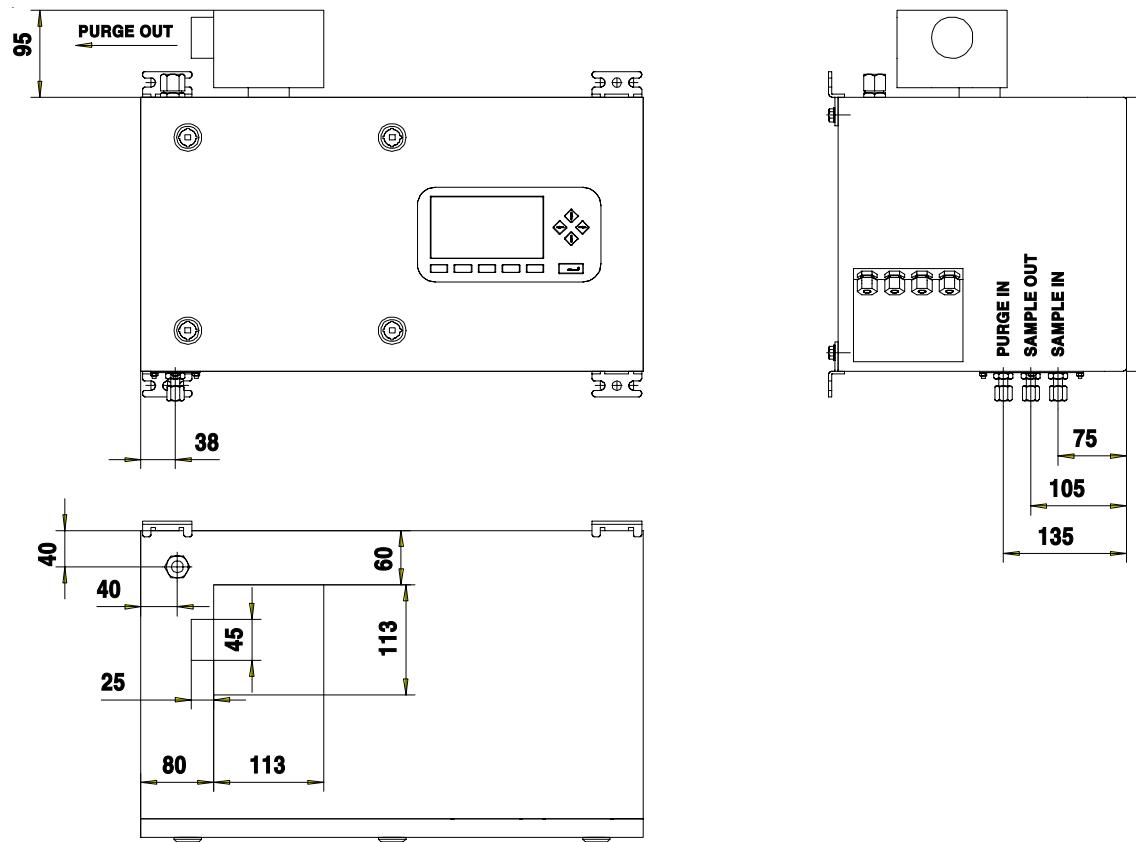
Dimensional sketch MLT 2 for Ex Zone 2 in standard housing [all dimensions in mm]
